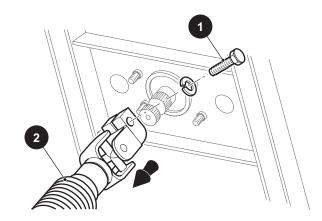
Disconnect Intermediate Shaft to Center Steering Wheel
